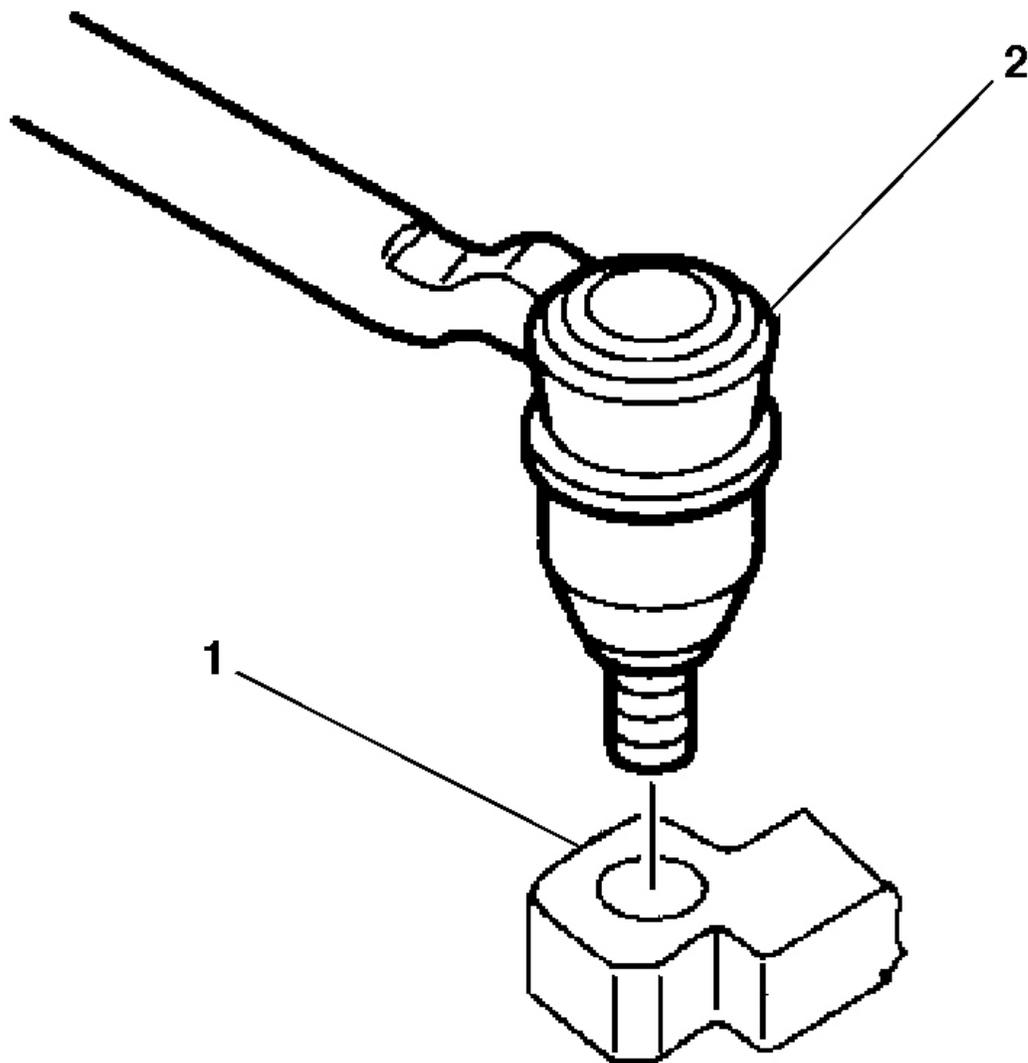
View Of Outer Tie Rod & Steering Knuckle
